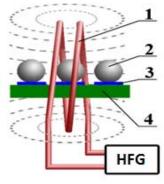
The circuit of induction heating solder balls: 1- ring inductor, 2 - ball, 3 - the bonding pad, 4 - PCB
